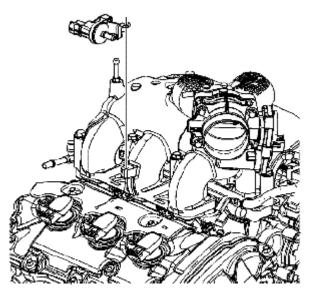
Identifying Long Intake Manifold Bolts Courtesy of SUZUKI OF AMERICA CORP.
